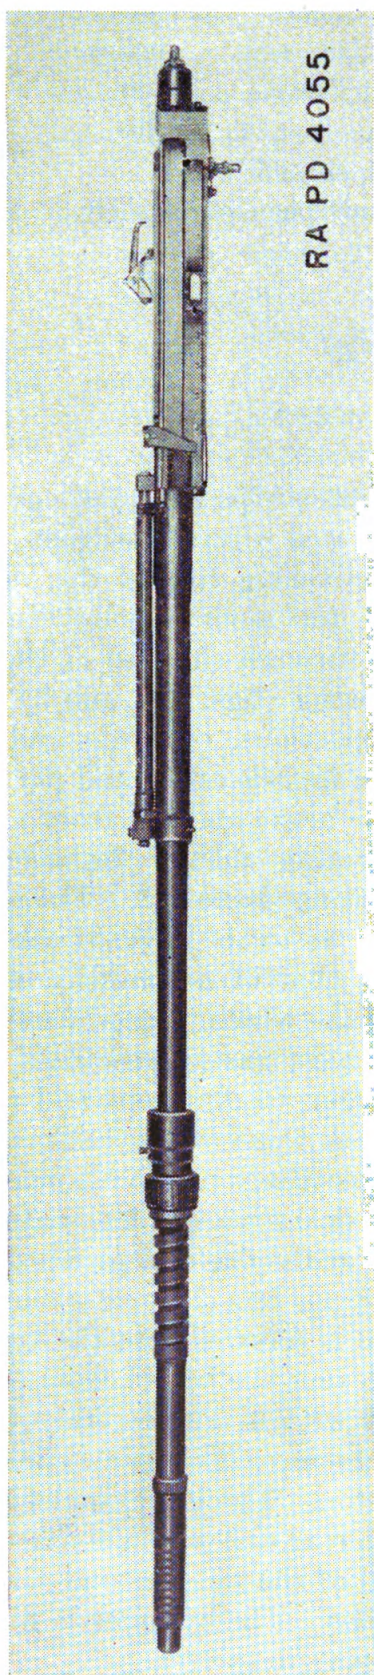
20-mm automatic gun M2, general assembly, left-side view.
